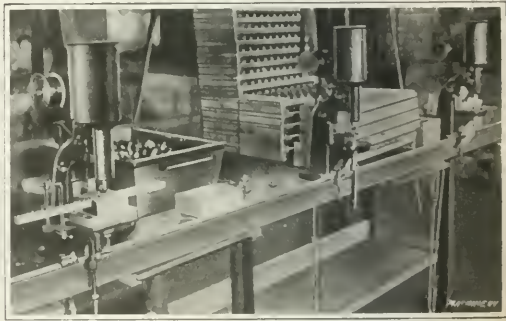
Grant Riveting Machines used in riveting Needle in Percussion Needle Plug
